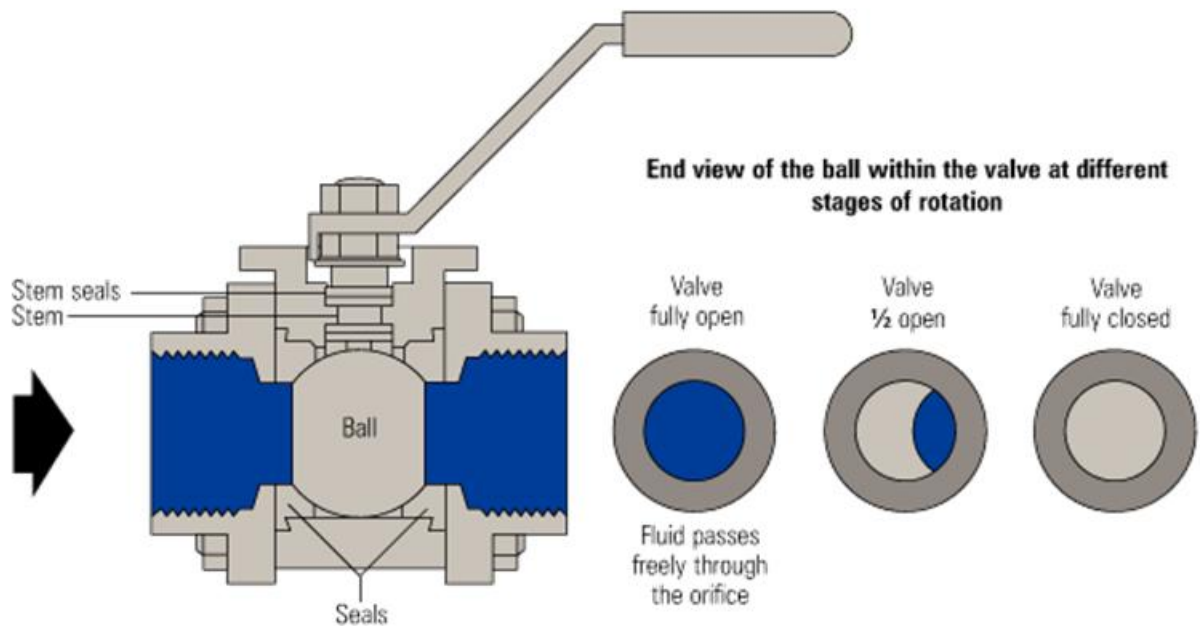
working of a ball valve<sup>1</sup>
